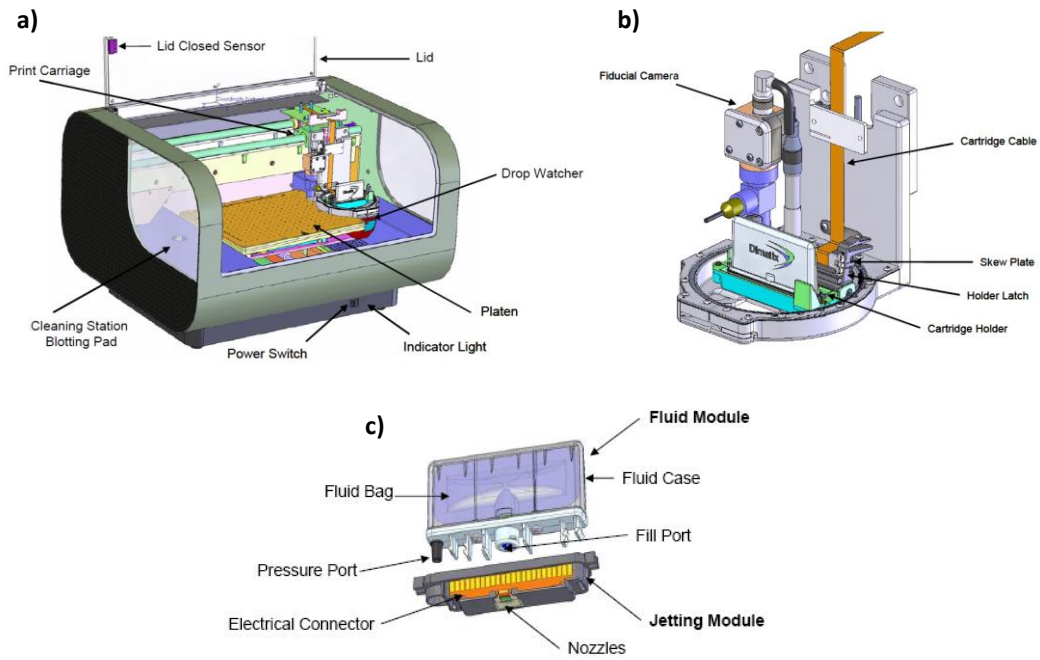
a) Dimatix material printer; b) printer cartridge assembly; and c) printhead and cartridge [82]-
